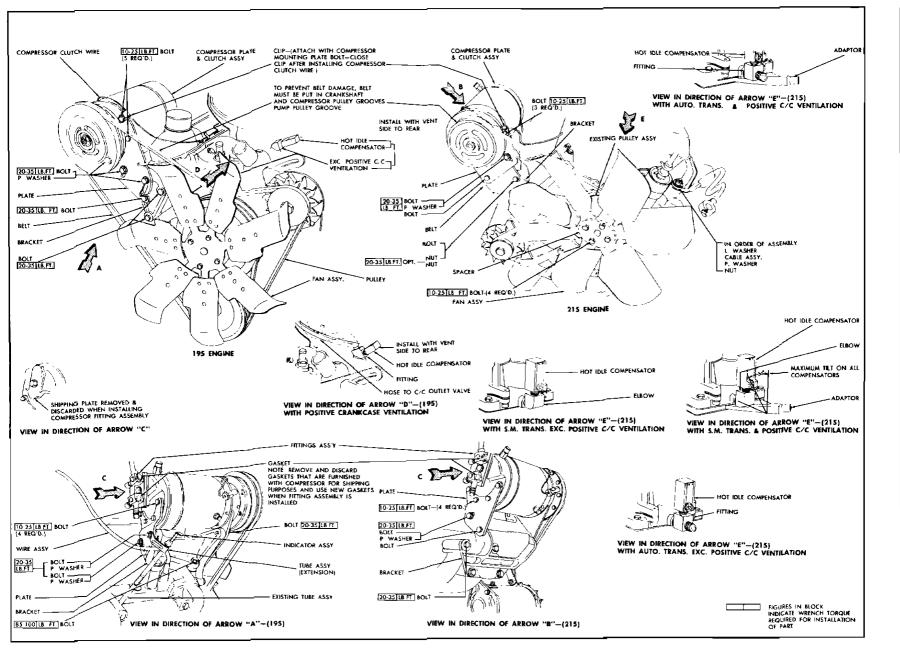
Reference Illustration-Tempest Cool Pack Engine Compartment
